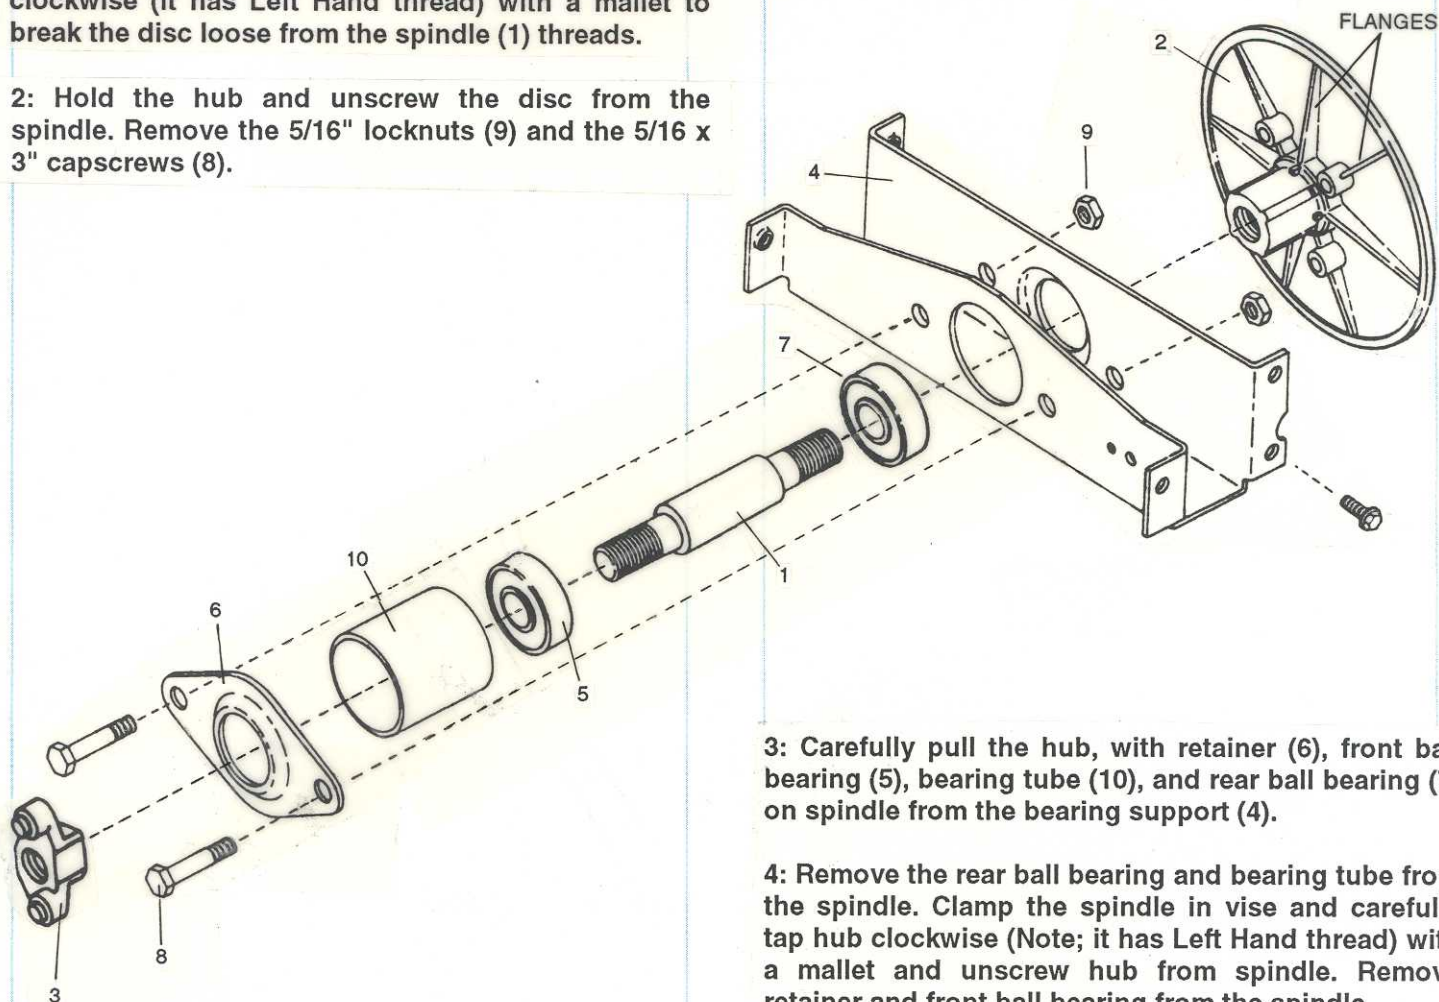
DISASSEMBLY OF STYLE "B" DISC & COMPONENTS
